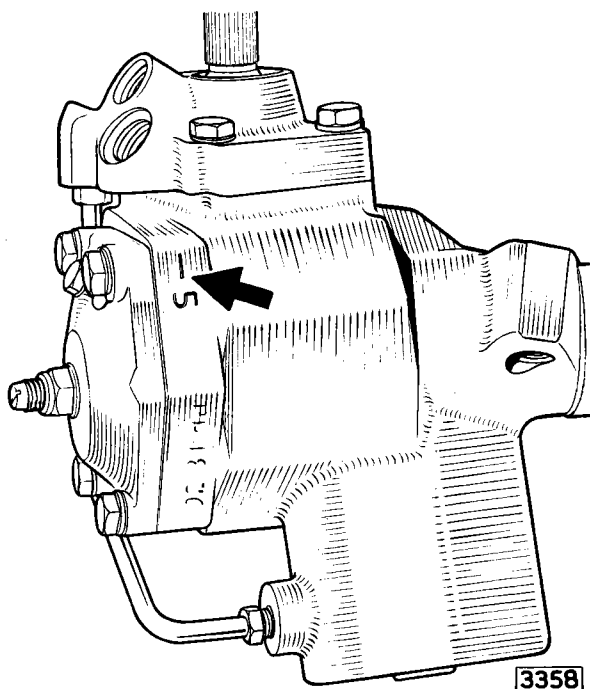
Location of the depth reading to facilitate the fitting of the valve shaft shims
